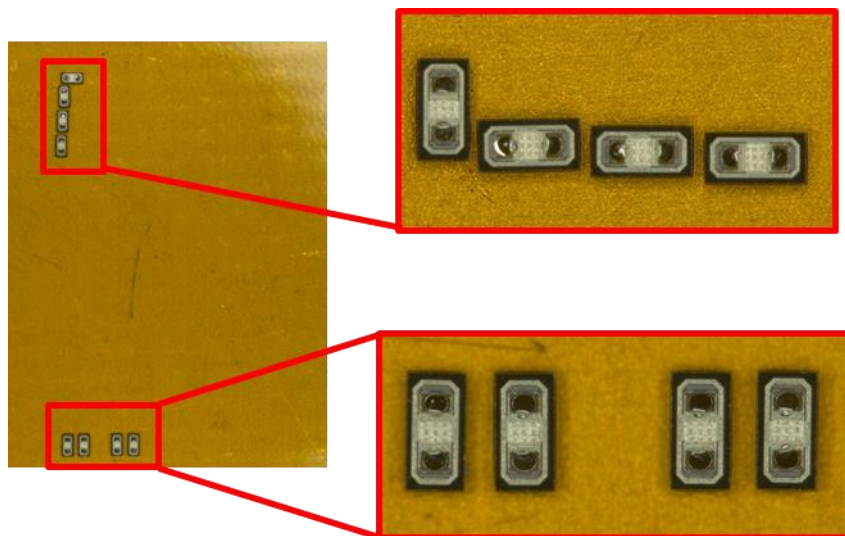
Microscopic picture of assembly test for the capacitors in SERENA module
